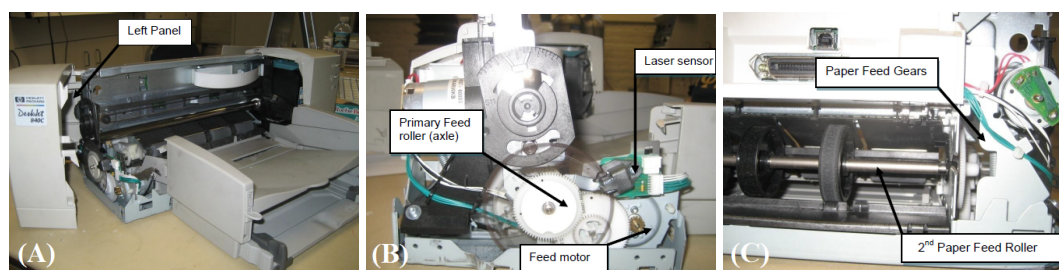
(A) Removing the outside case, (B) Side view, showing the laser encoder and paper feed motor, (C) Rear view, showing the paper feed gears and the second paper feed roller, now removed.
